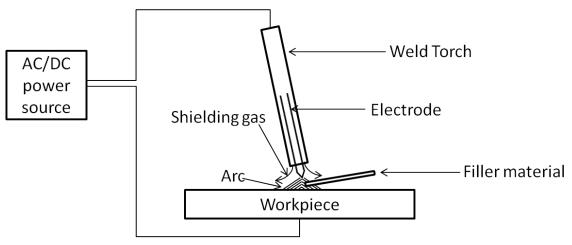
Schematic illustration of a TIG welding torch.
